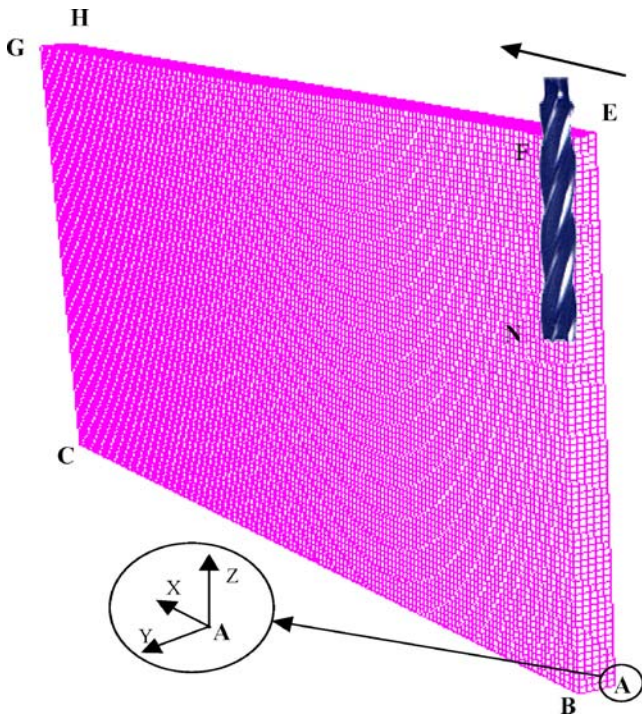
Machining geometry in machining thin wall part at the initial cutting position
